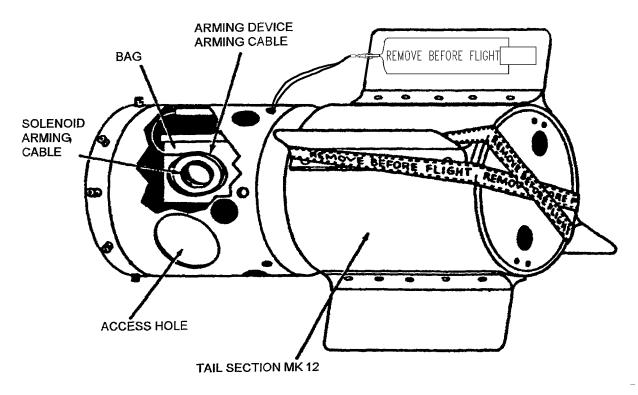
B. Arming Cable (Arming Device and Solenoid) Removal from Tail Section Mk 12 (Mine Mk 63)
